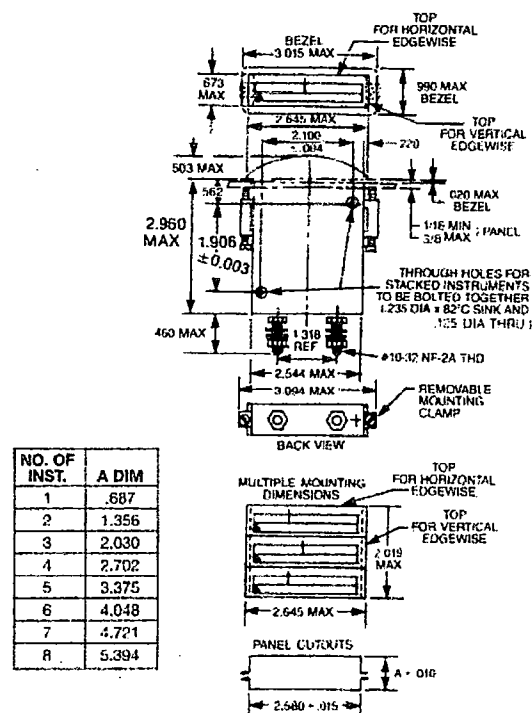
Outline Dimensions for 2½-inch Type 287 meters
